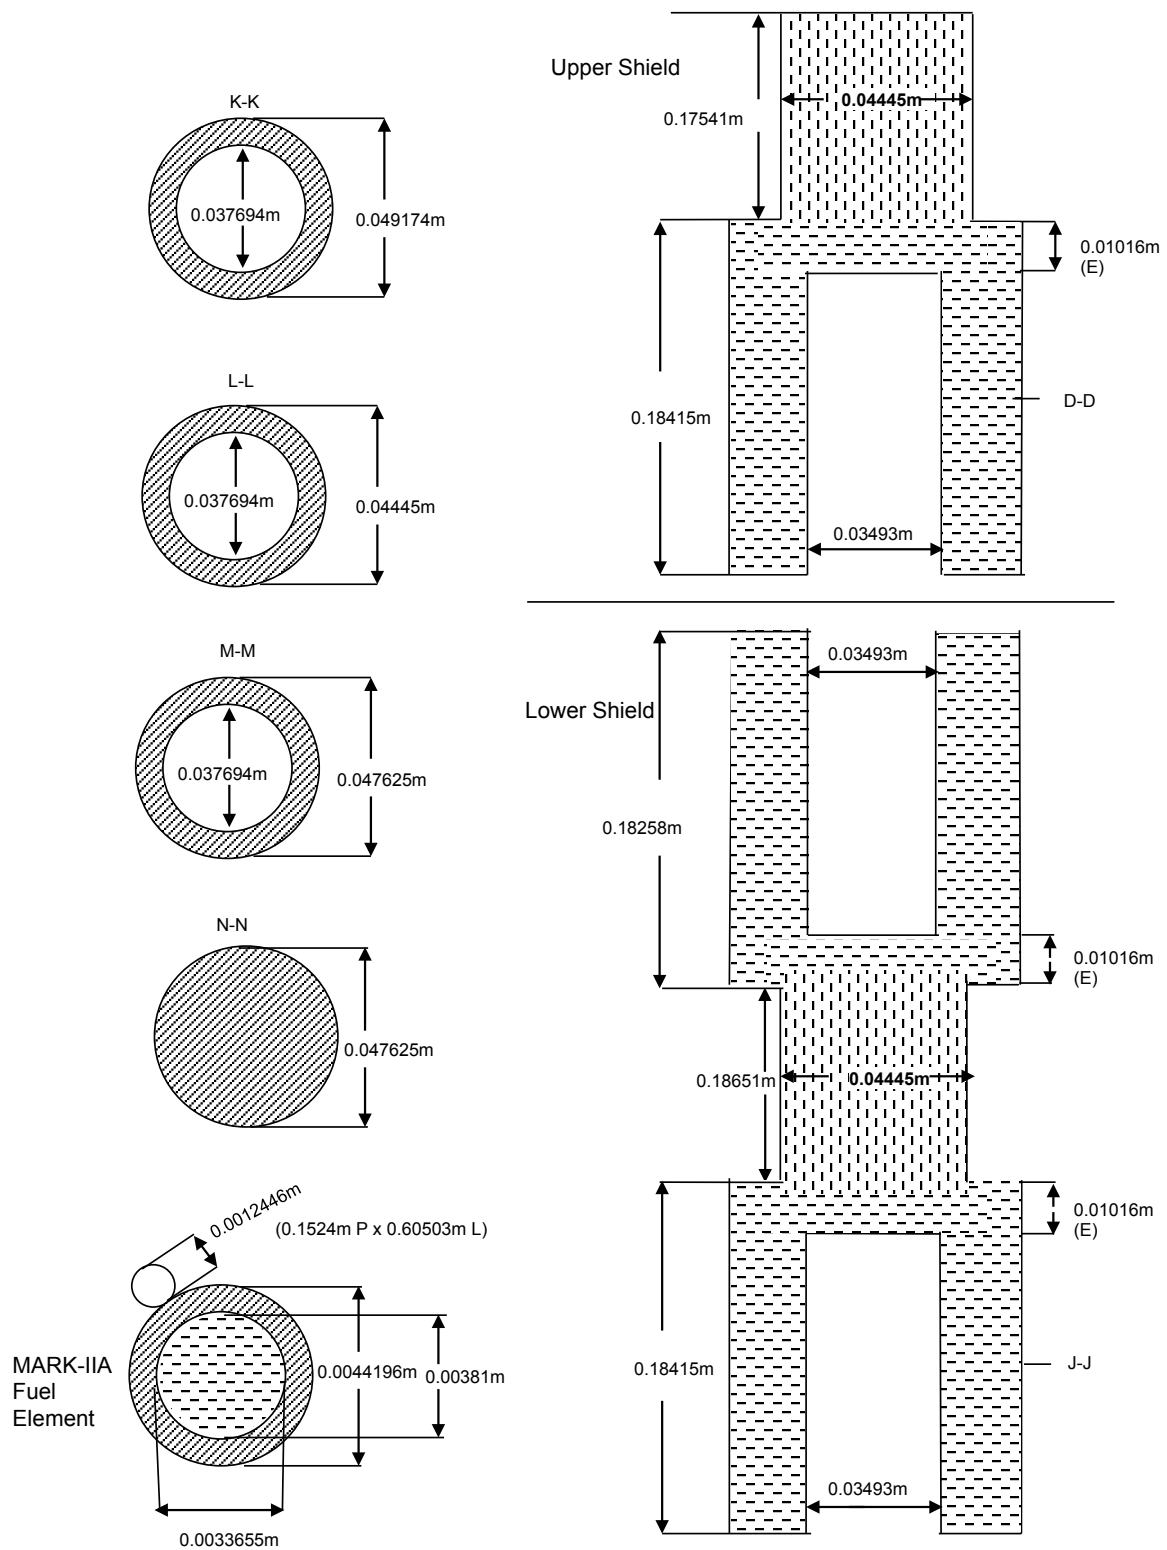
MARK-II A Core Driver elevation and plane sections
